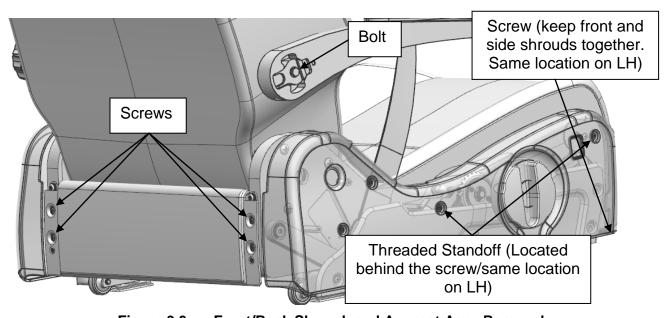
Front/Back Shroud, and Armrest Assy Removal
